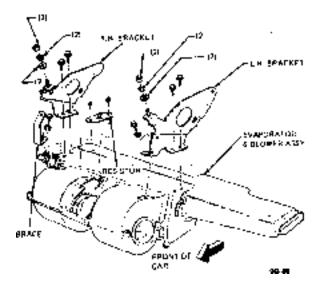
B-67 Evaporator and Blower Assembly Brackets and Attachments • Opel 1900 • Manta
